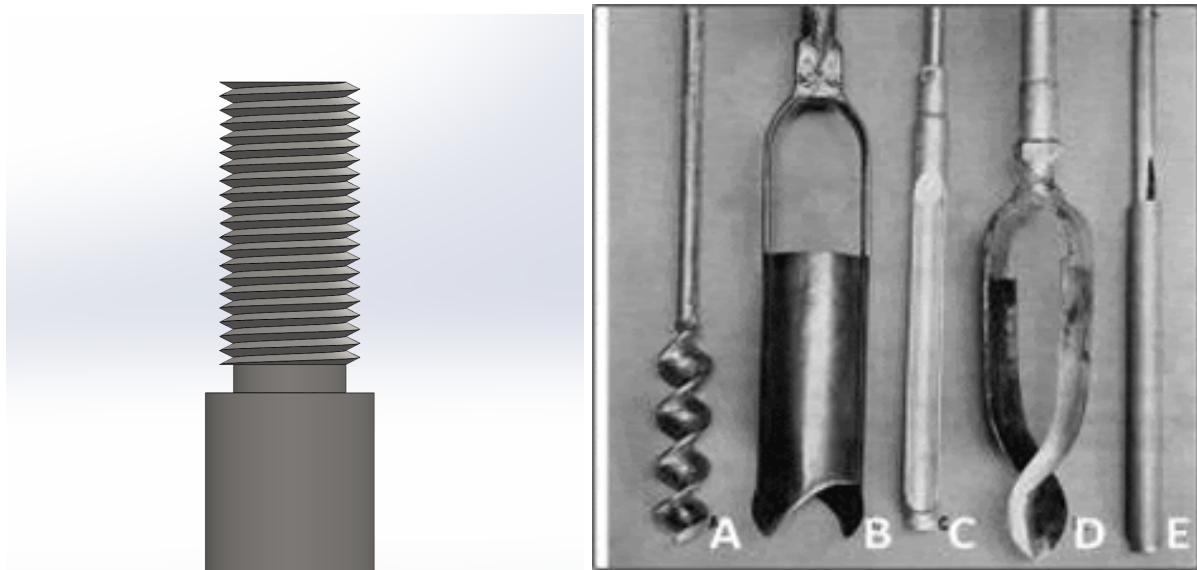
Attachable mount to allow for existing coring tools to be mounted to our device.
